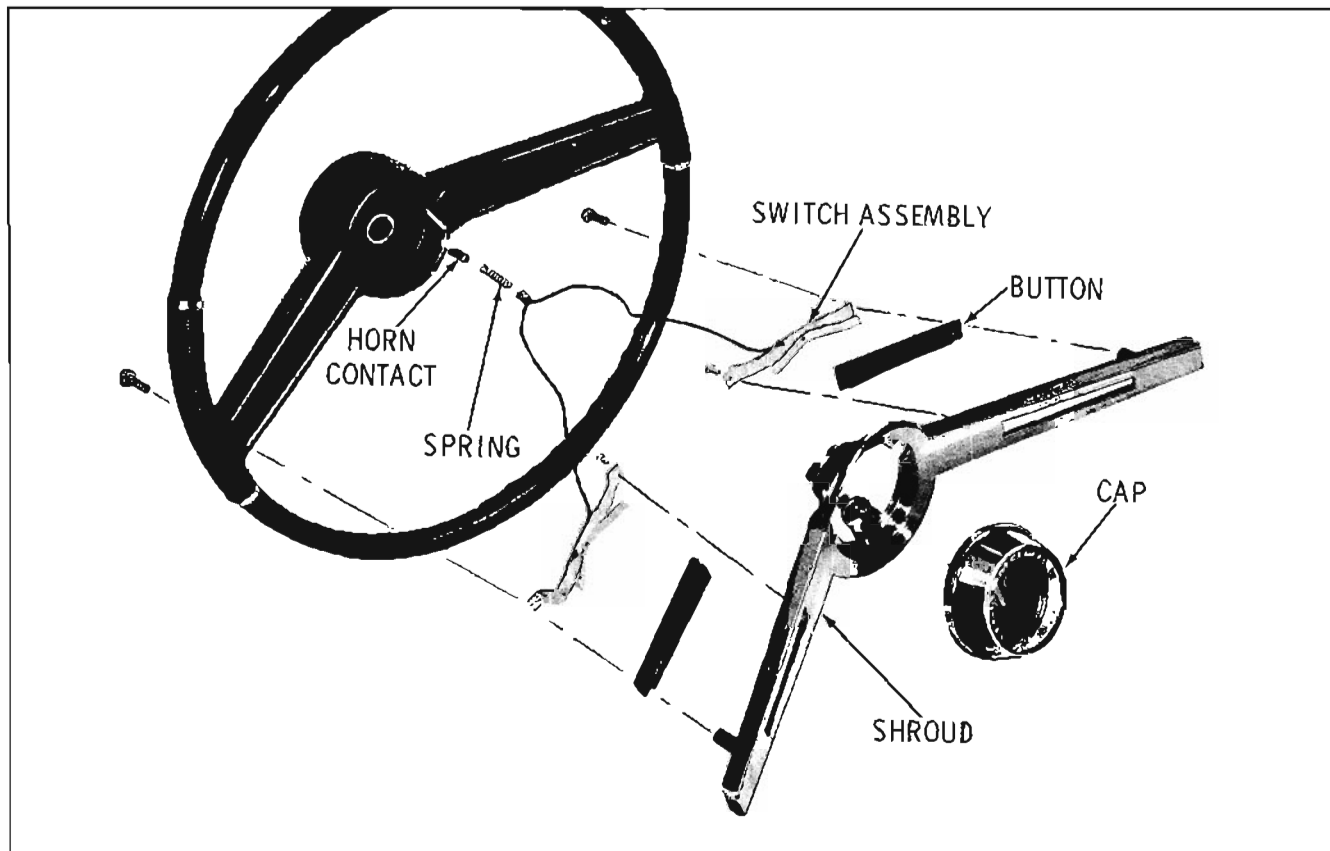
Deluxe Steering Wheel (30 - 31 & 32 Series)
